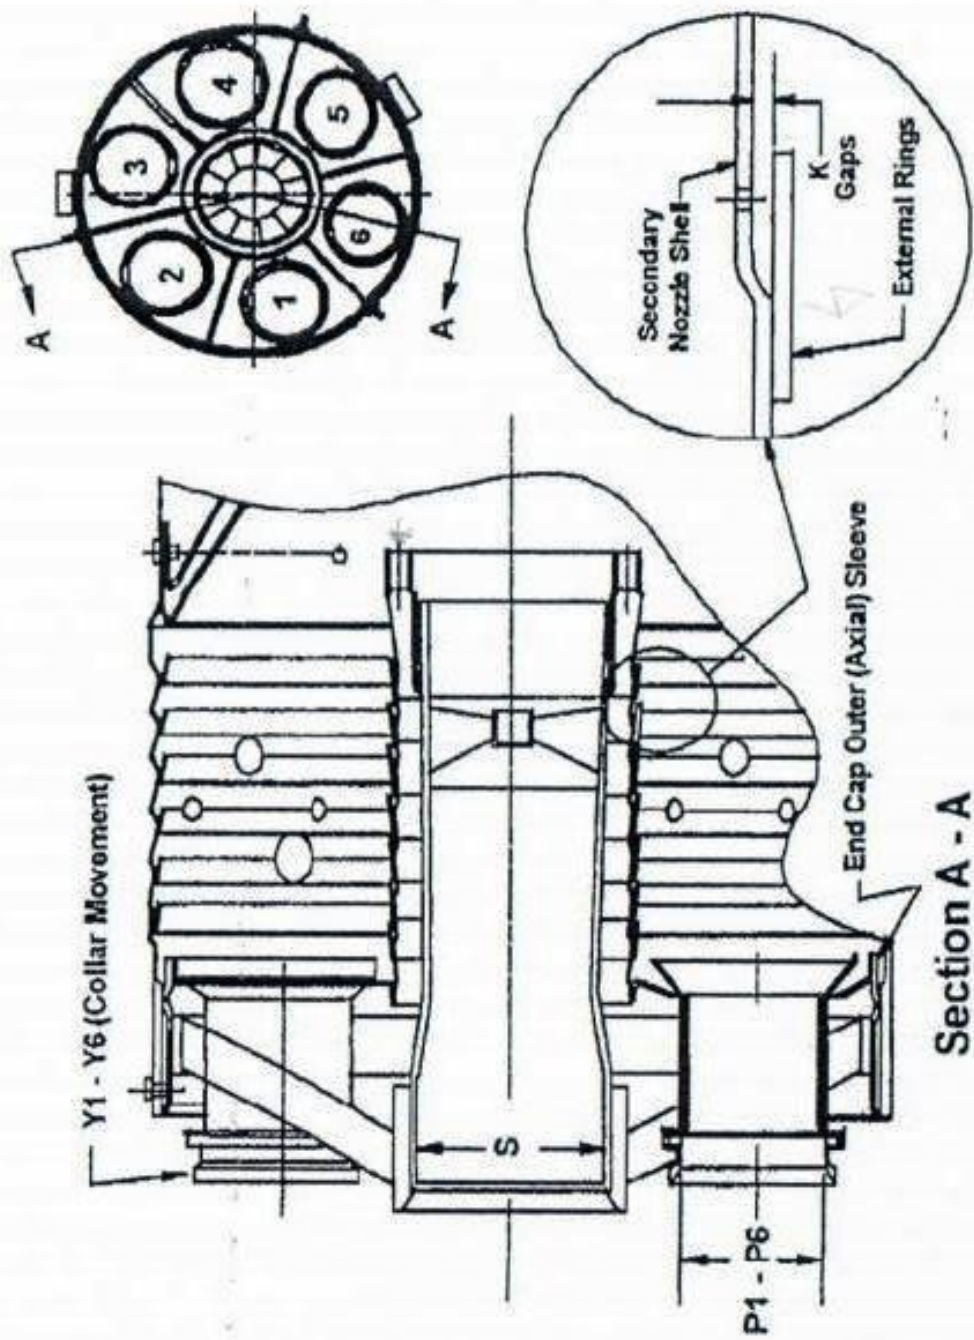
DLN Version 1 Combustion Liner Dimensional Inspection Sketch Overall Dimensions
